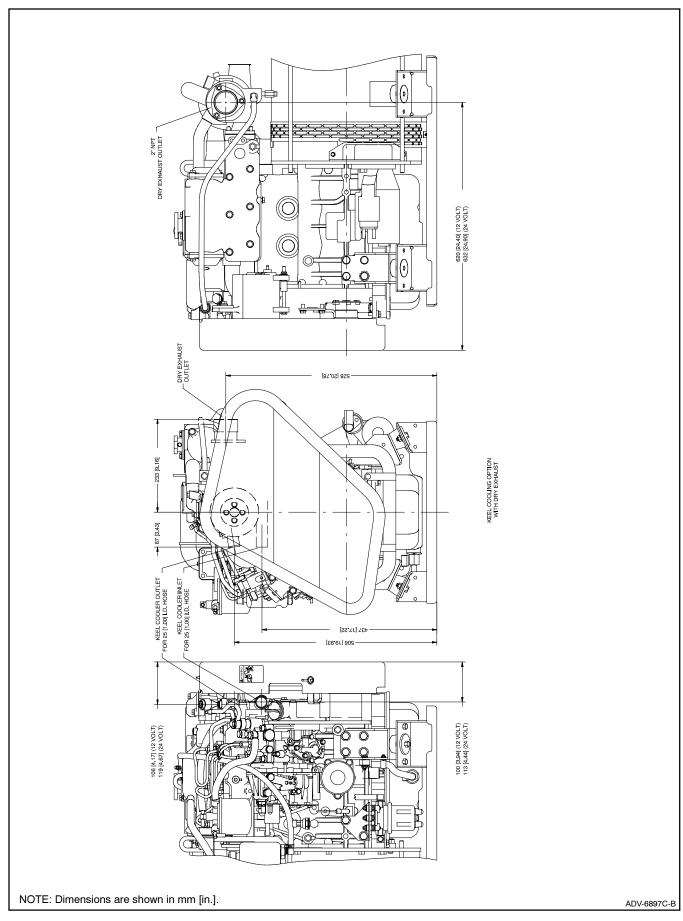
Dimension Drawing, 14/15.5EOZD and 11.5/13EFOZD with Keel Cooling
